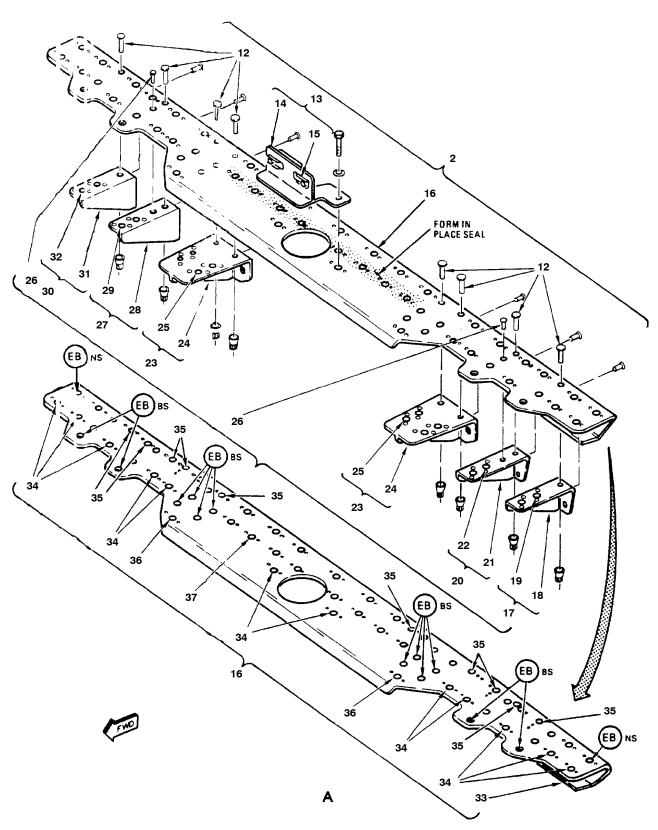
Upper and Lower Support Assemblies (Sheet 2)
